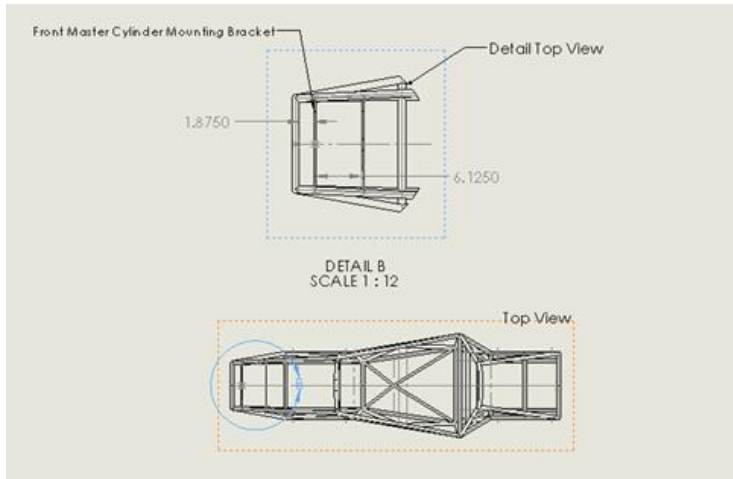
Placement of Master Cylinder Mounting Brackets in Frame
